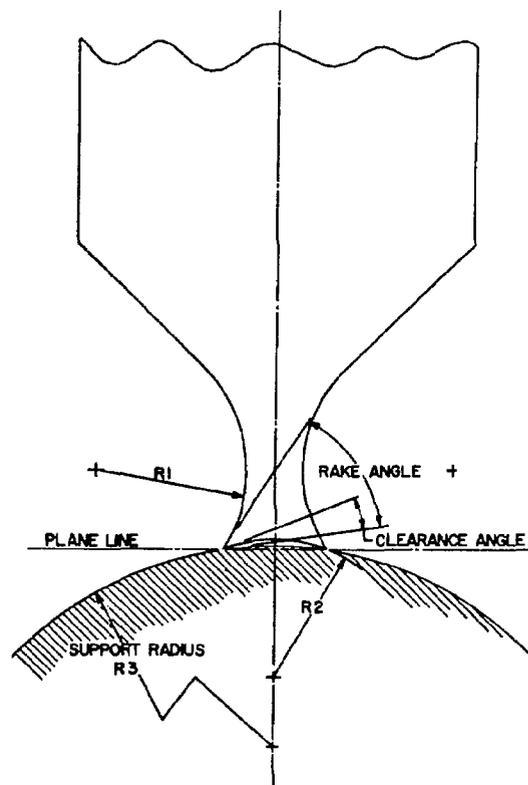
Stripper blade profile - NASA mechanical stripper.
